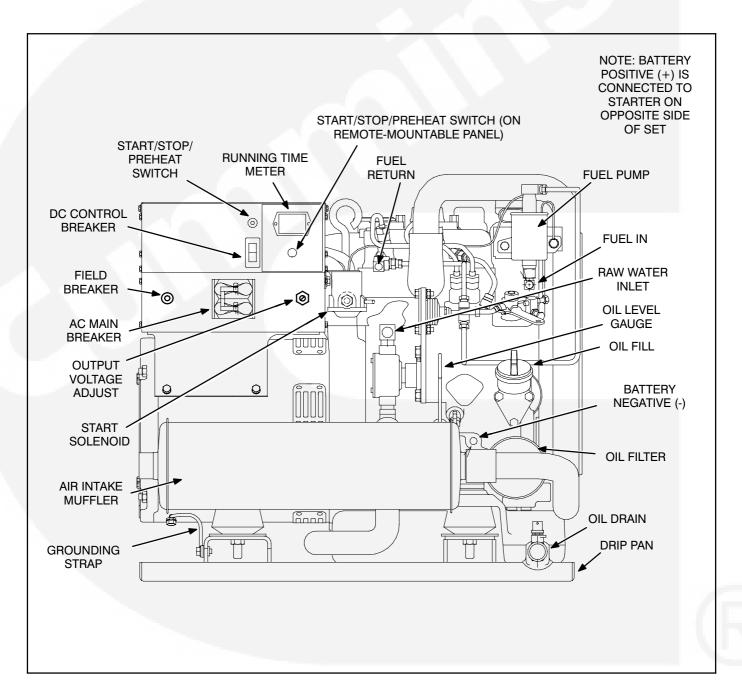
GENERATOR SET COMPONENT LOCATIONS (MDKUB SHOWN WITHOUT HOUSING)
